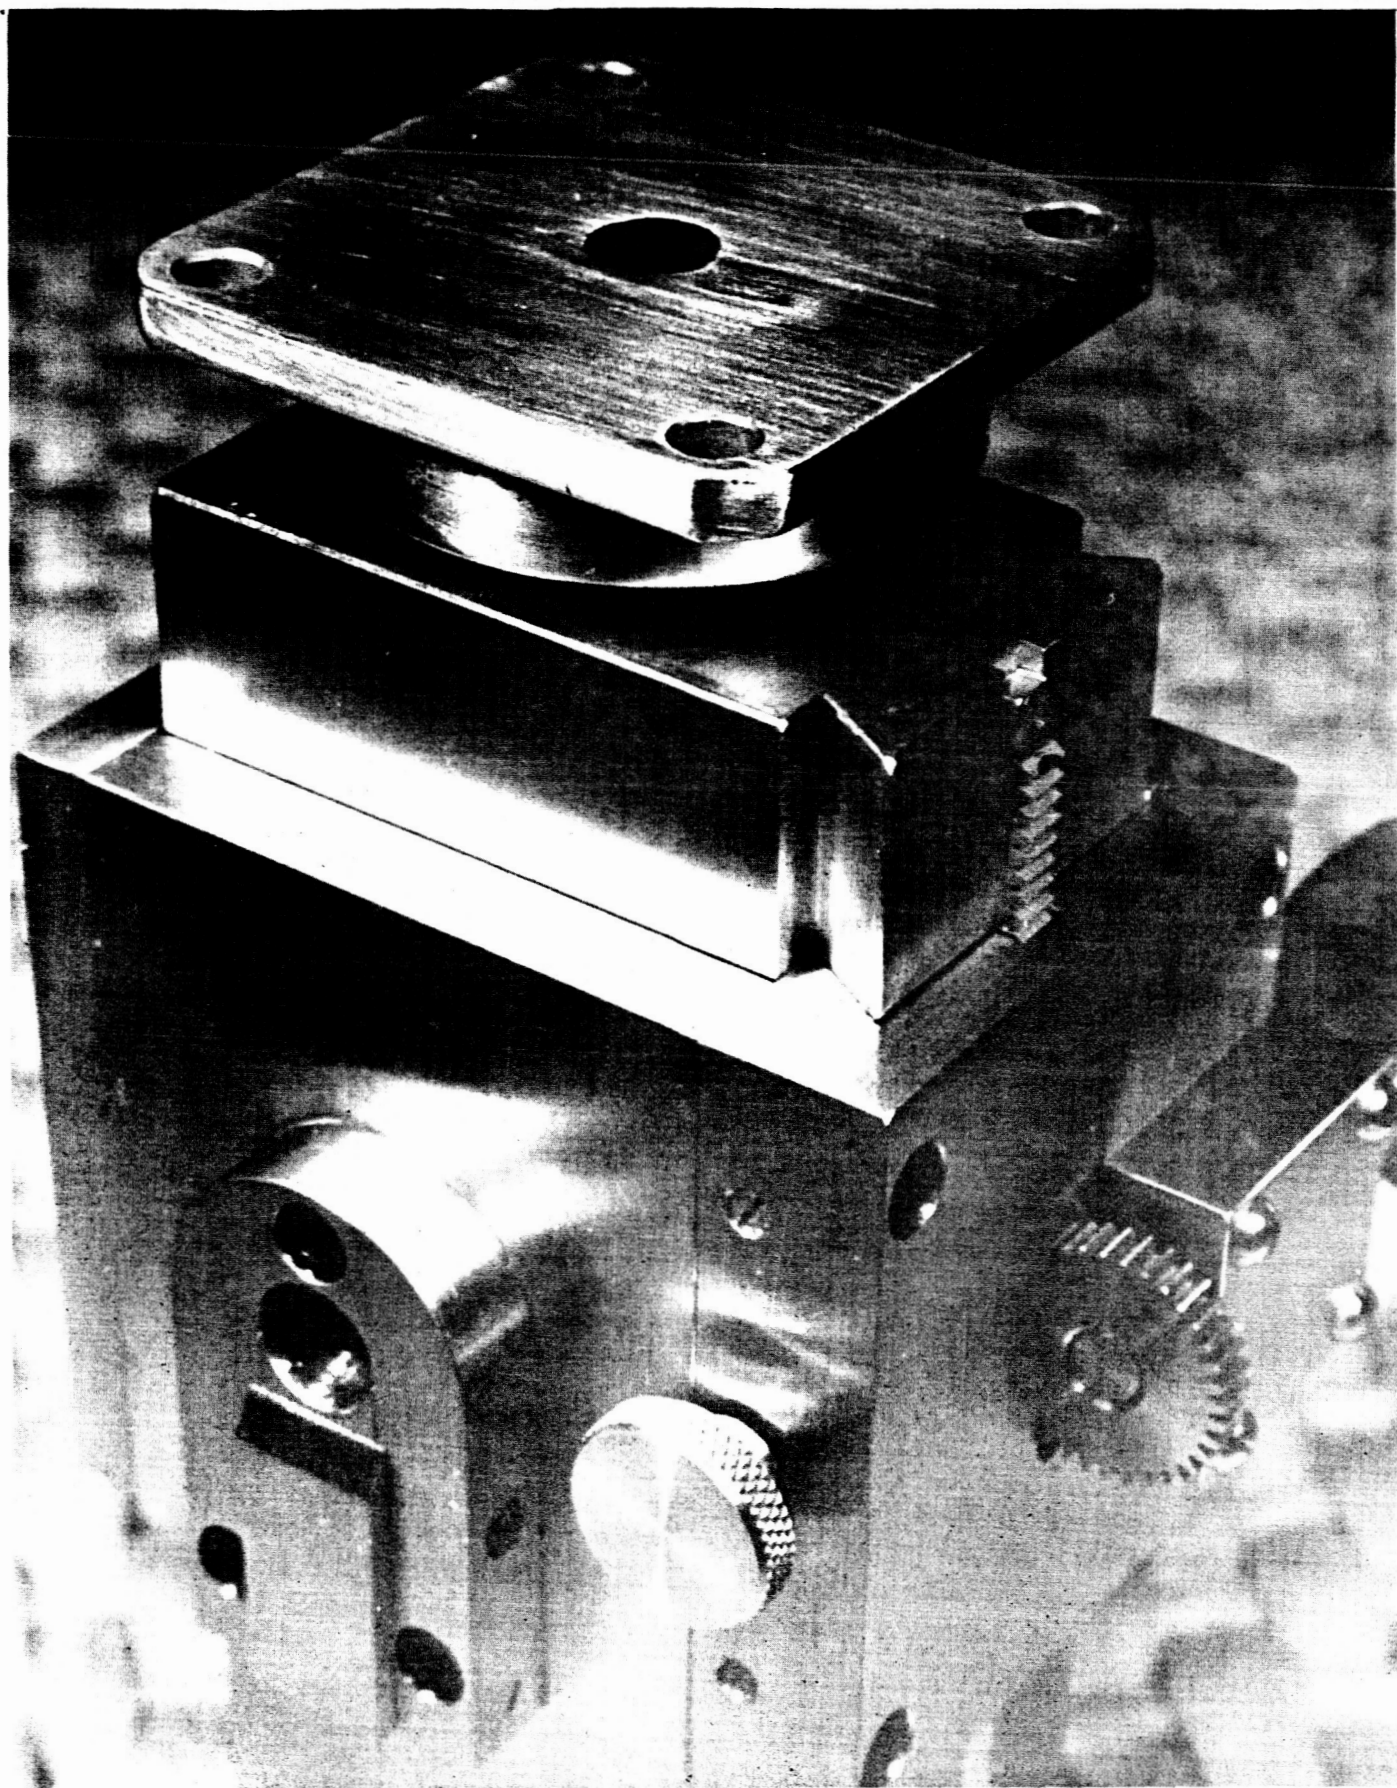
Close-up showing saddle dovetail and clamping screw.
